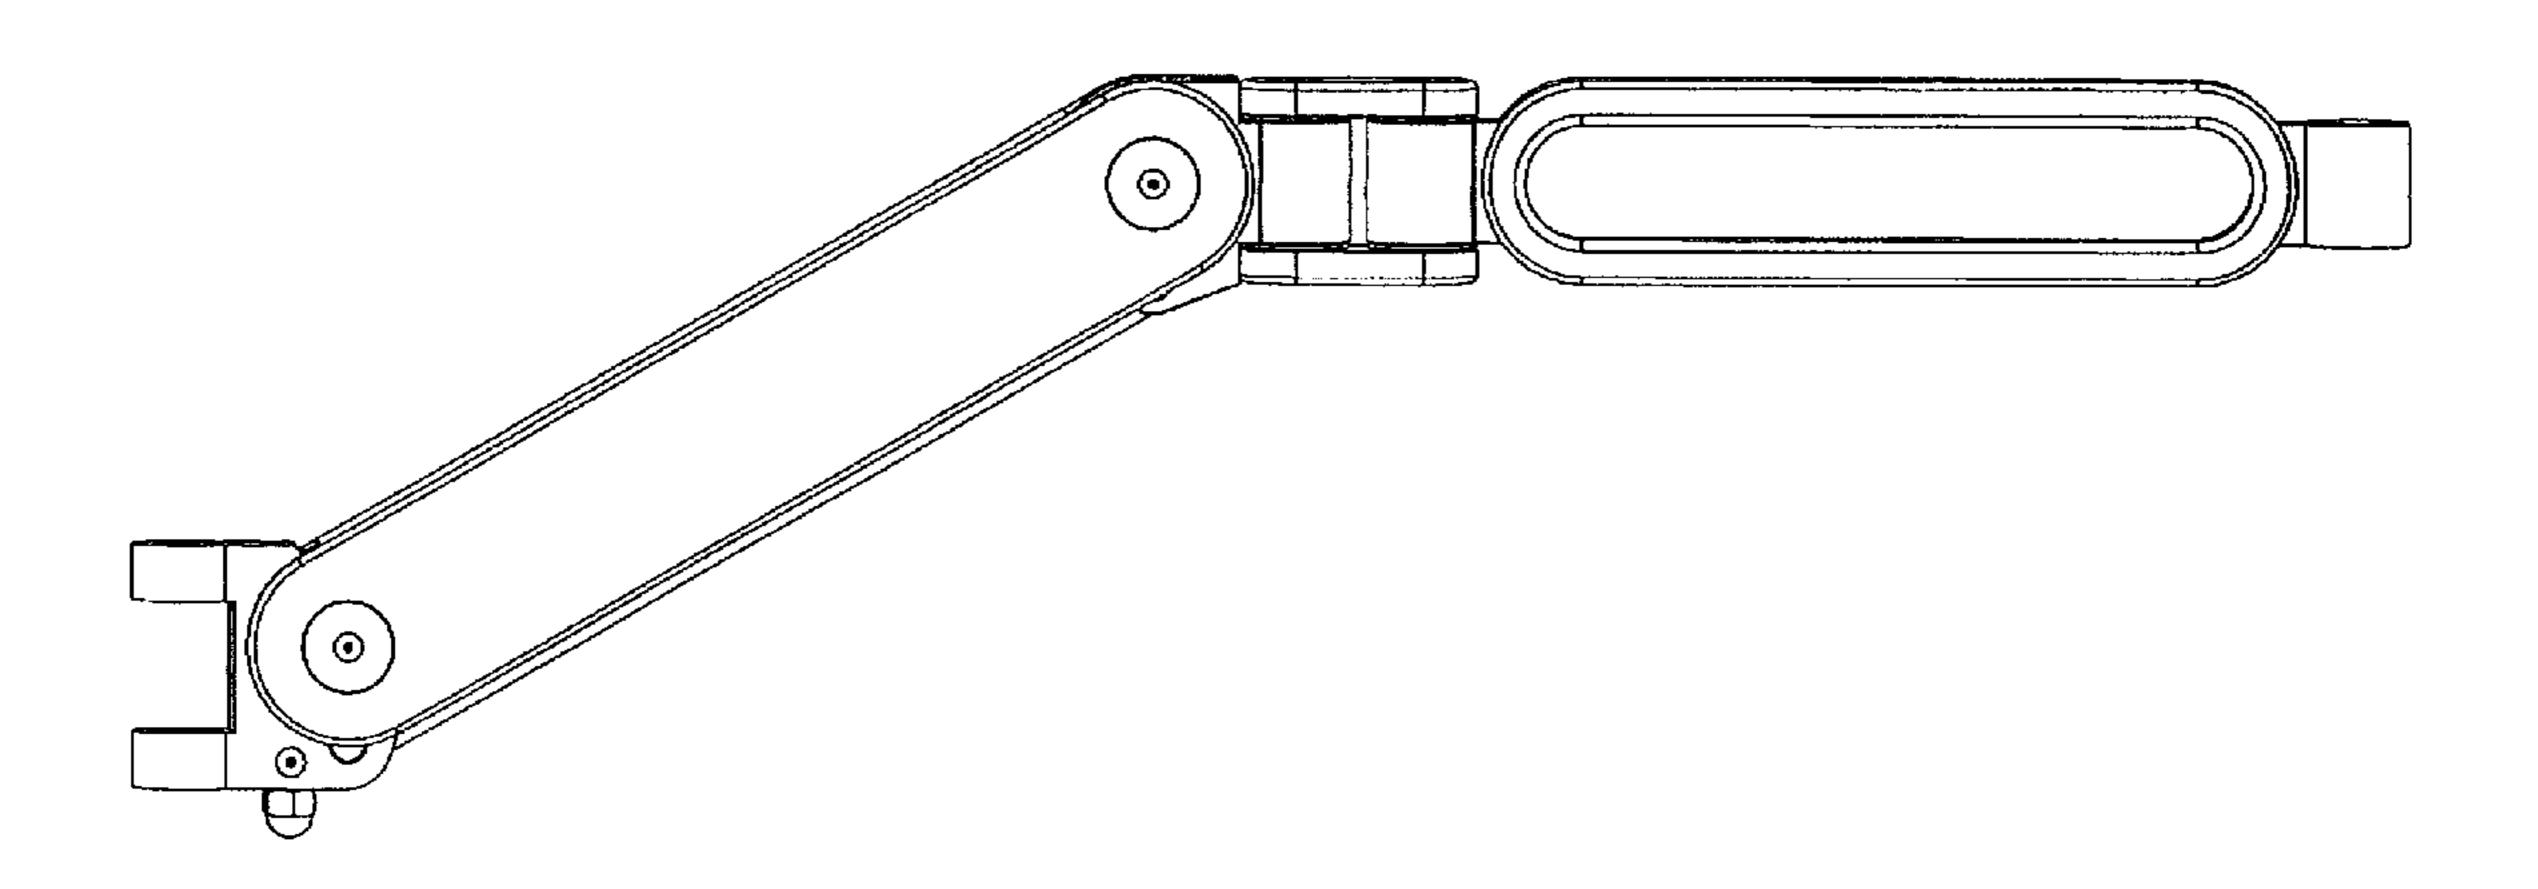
is a bottom, rear perspective view of the device support arm in a lowered, folded position;
